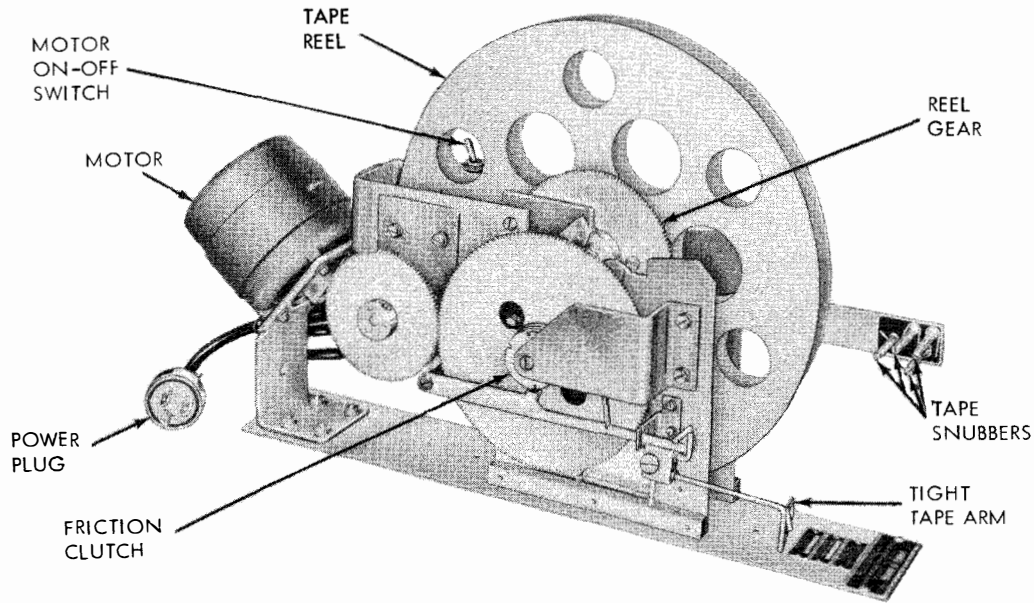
Motor Driven Tape Reeling Machine RL-173/FGC, Left Side View
